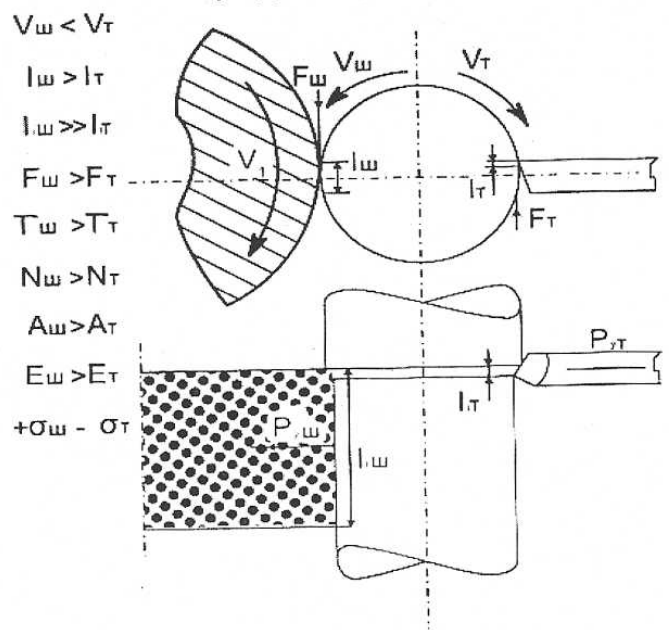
Scheme contact tool from workpiece during grinding and turning.
